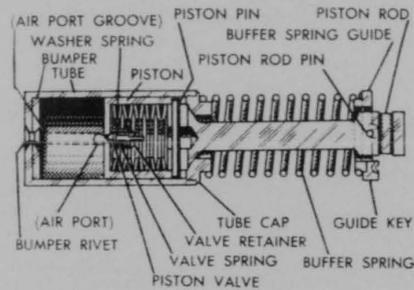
Barrel Buffer Assembly with Piston in Forward Position—Sectional View.
